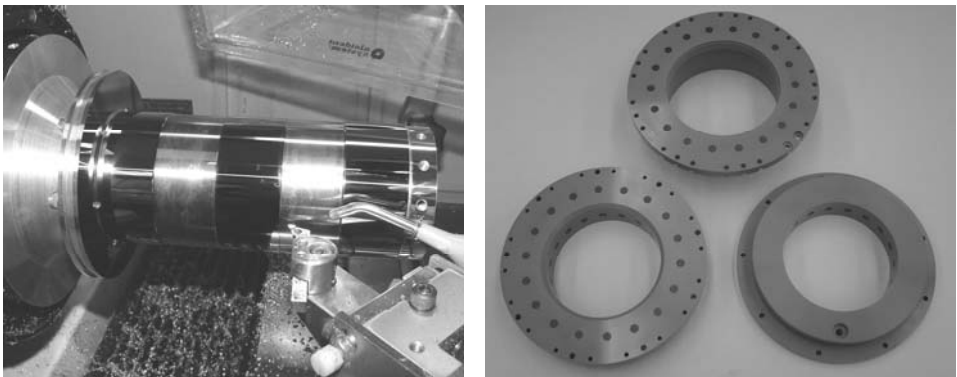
$\Psi$ -axis rotor, bearing rings and bearing assembly
